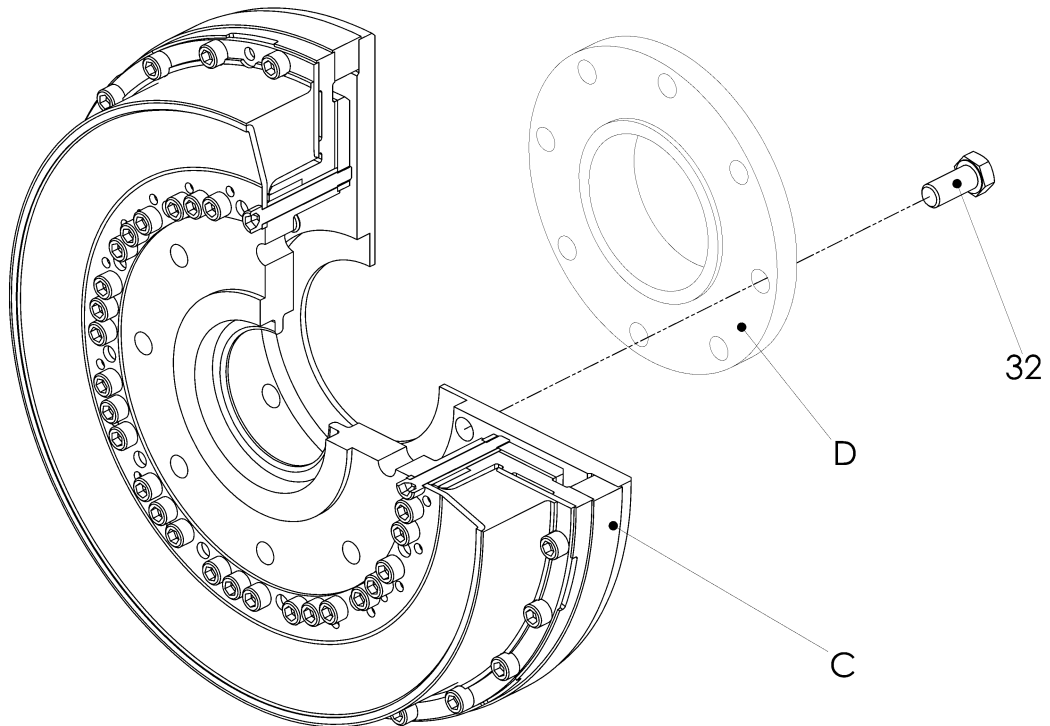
Mounting the coupling types -FA.. and -FB.. to the flange
